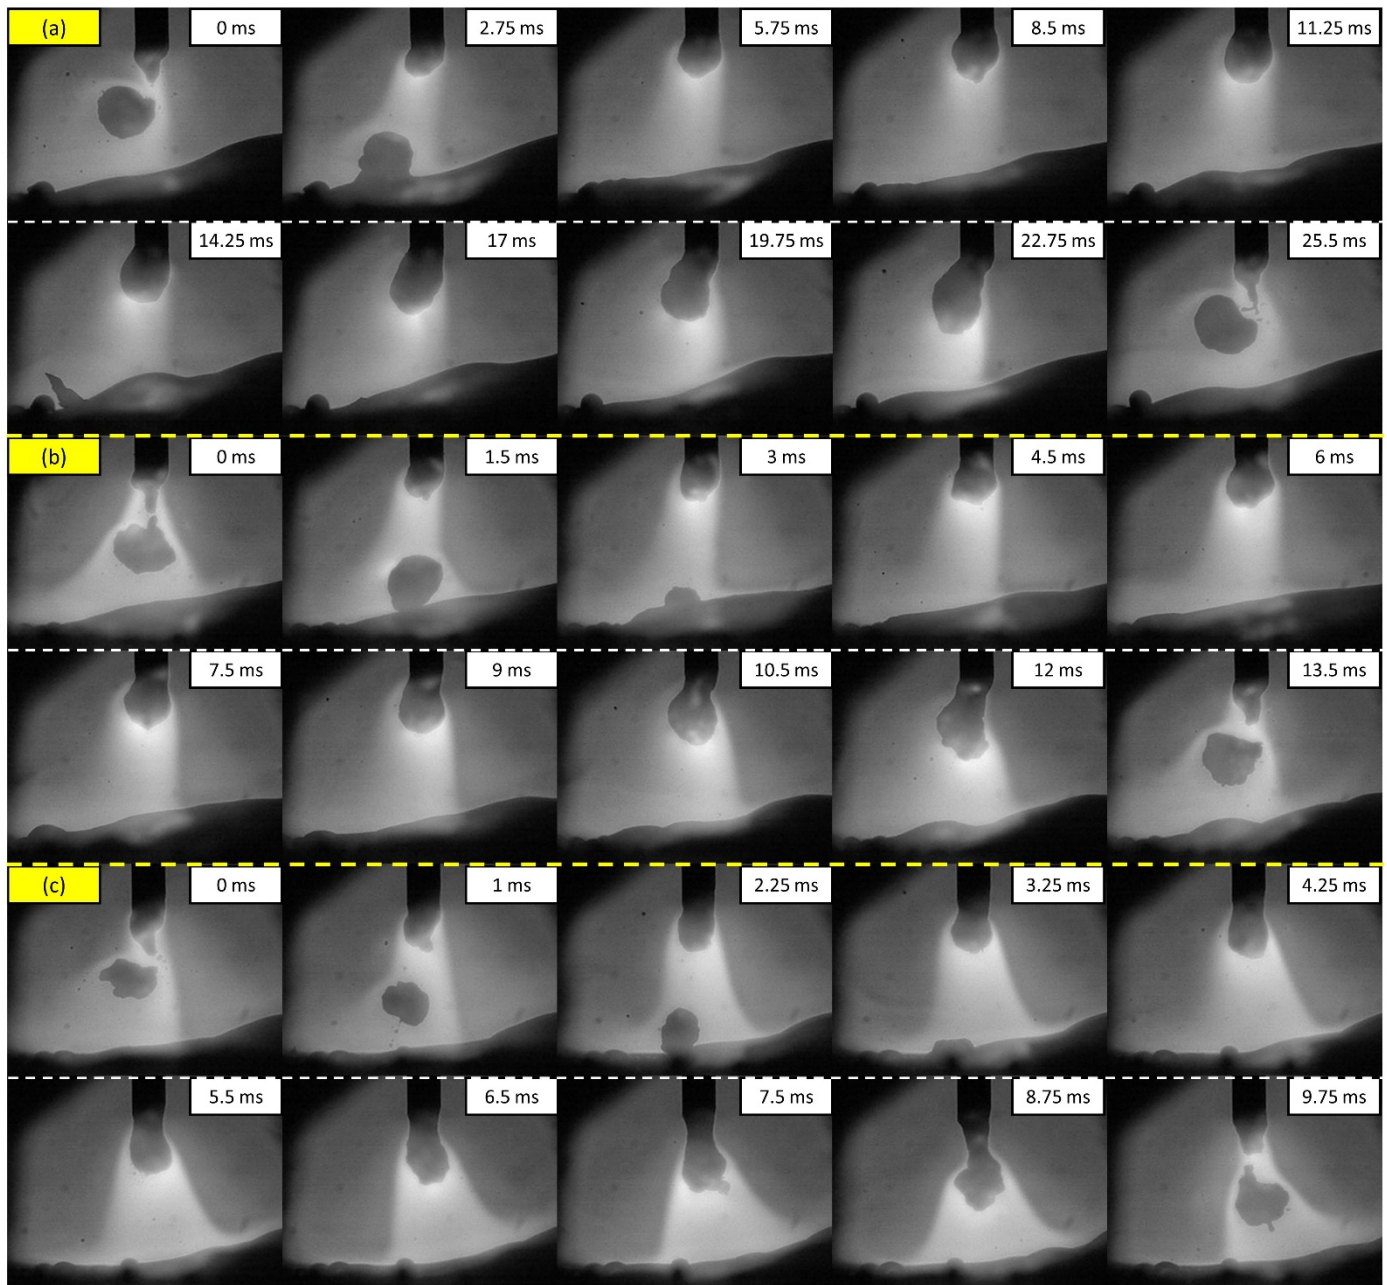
Sequential images of metal transfer in metal-cored wire in 220 A (a), 250 A (b), and 280 A (c) of welding current.
